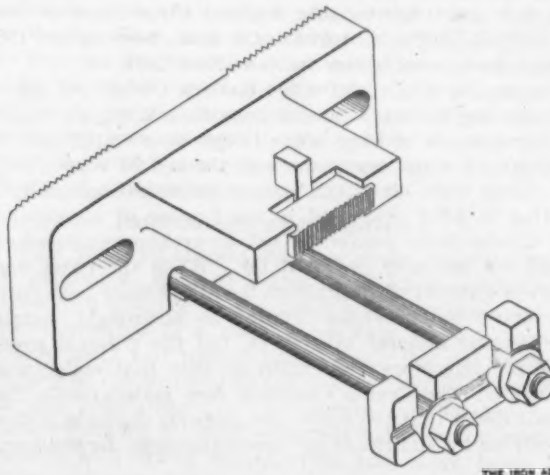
The Teas Lathe Driver for Securing Locomotive Driving Wheels to the Lathe Face Plates.
